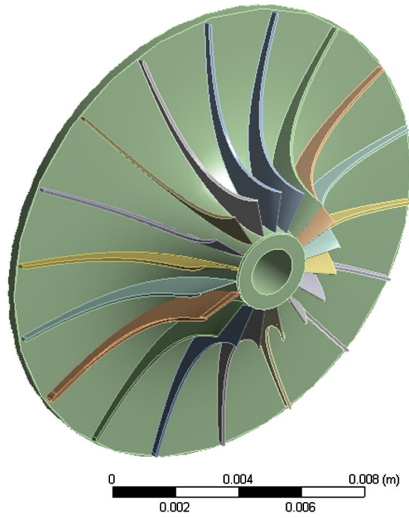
Advanced turbine rotor design with shroud removed to illustrate blade design.
